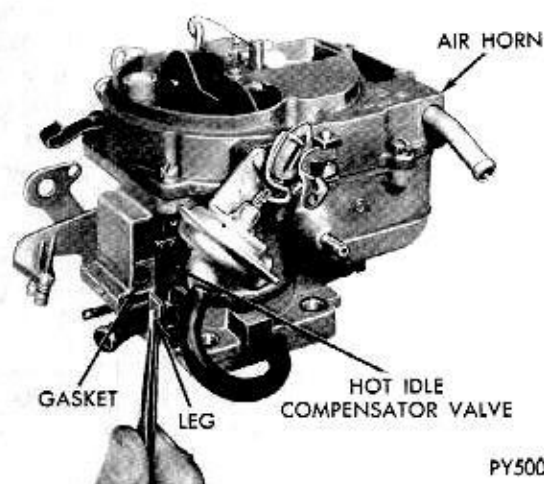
Removing or Installing Hot Idle Compensator Valve
